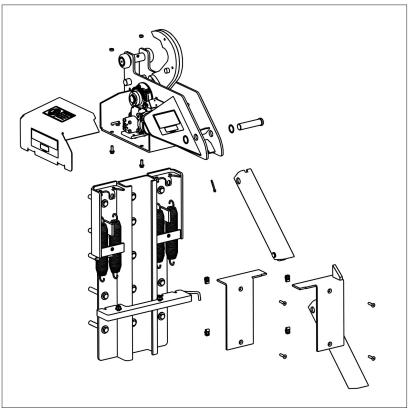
F—INSTALL CARRIAGE ASSEMBLY INTO ROLLER TRACK
